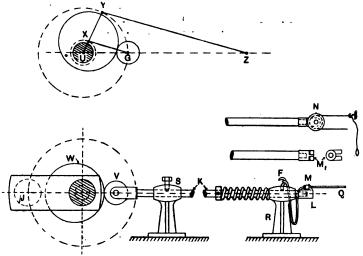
A Reducing Gear used by Messrs. Hick, Hargreaves, and Co.
